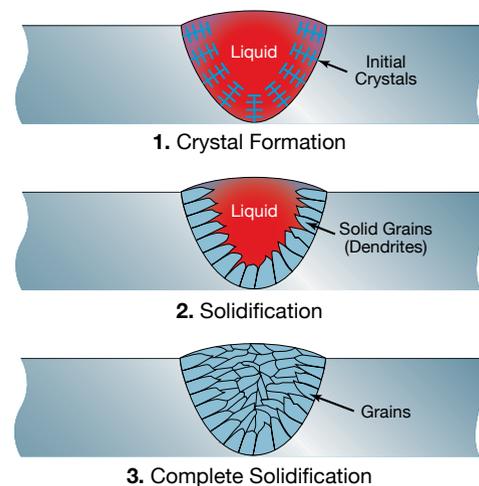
The Solidification Pattern of the Weld Area
